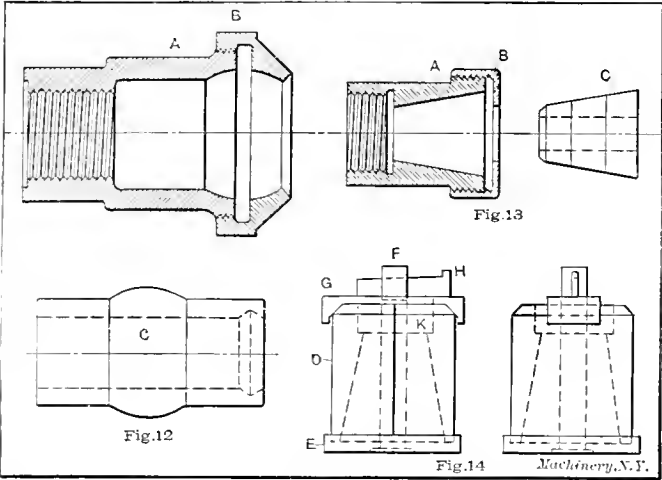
Simple Chuck in which Bearing *C* is bored. Fig. 13. Chuck for Boring Part *C*. Fig. 14. Babbitting Jig in which Part *C* is cast
